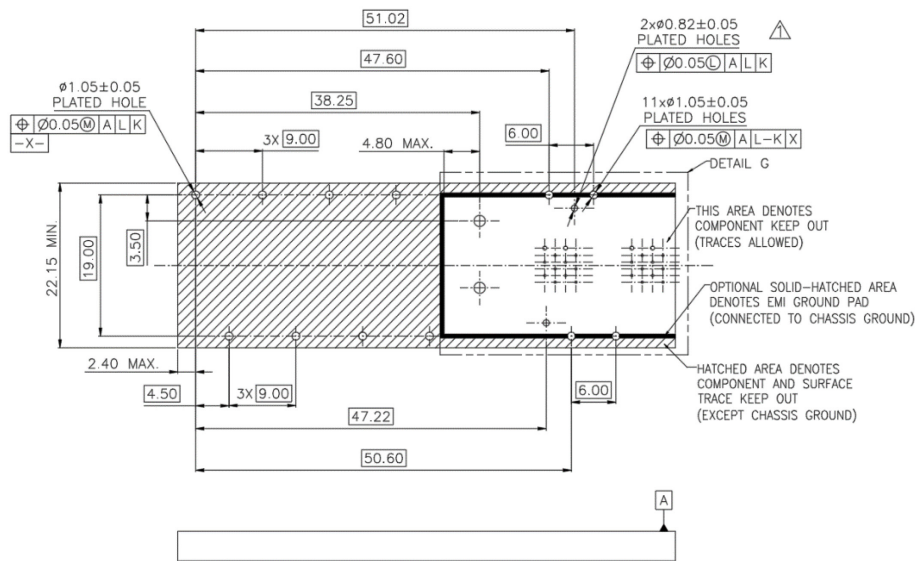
QSFP112 2X1 SMT Connector and cage PCB layout
